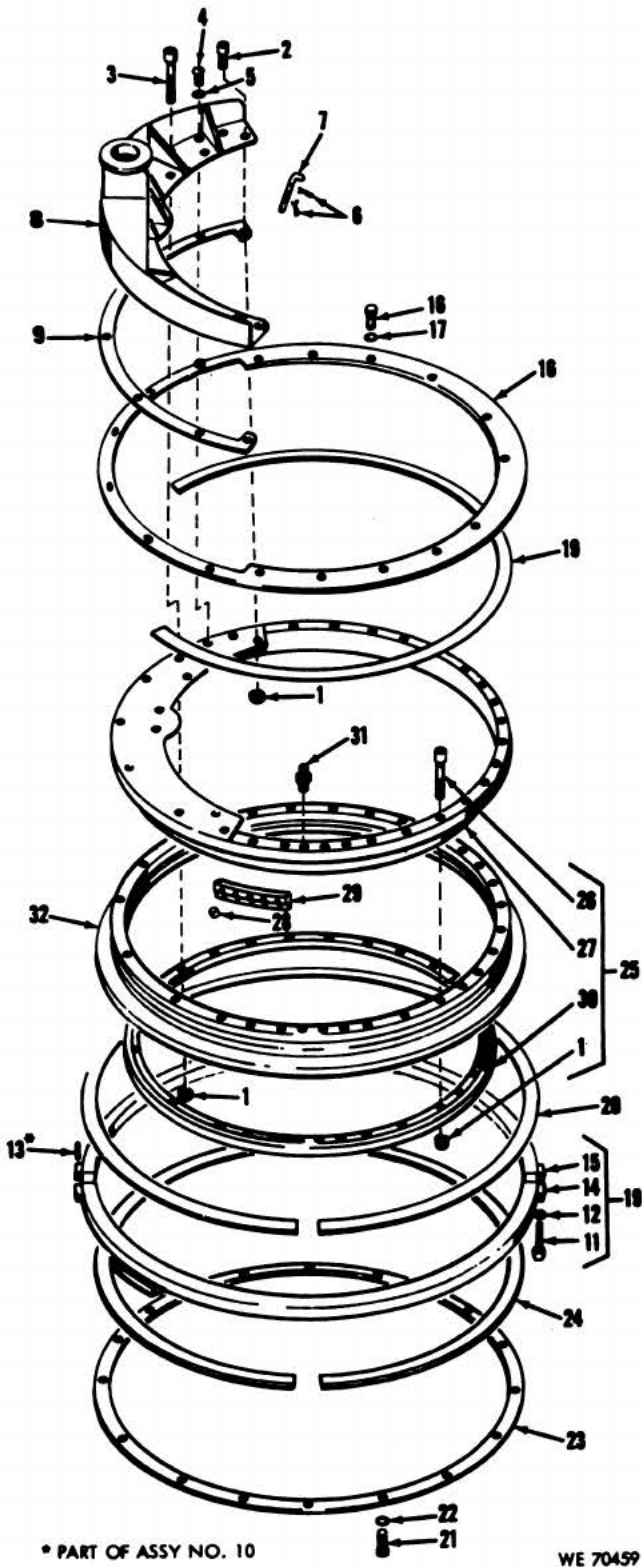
Ring group (for M68 series mounts)—exploded view.
